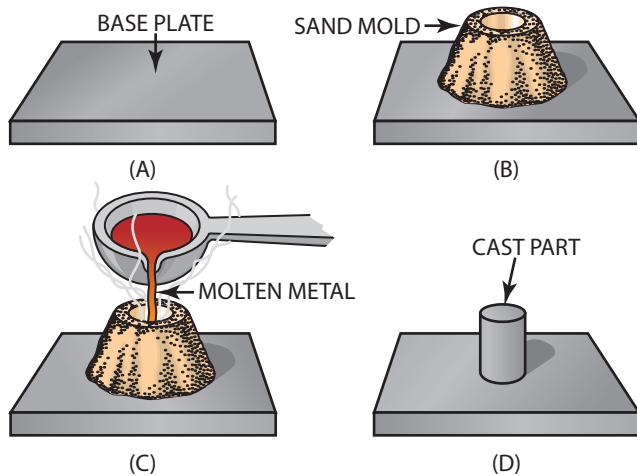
Direct casting: (A) base plate to have part cast on it, (B) sand molded into shape desired, (C) pouring hot metal into mold, and (D) part cast is now part of the base plate.
